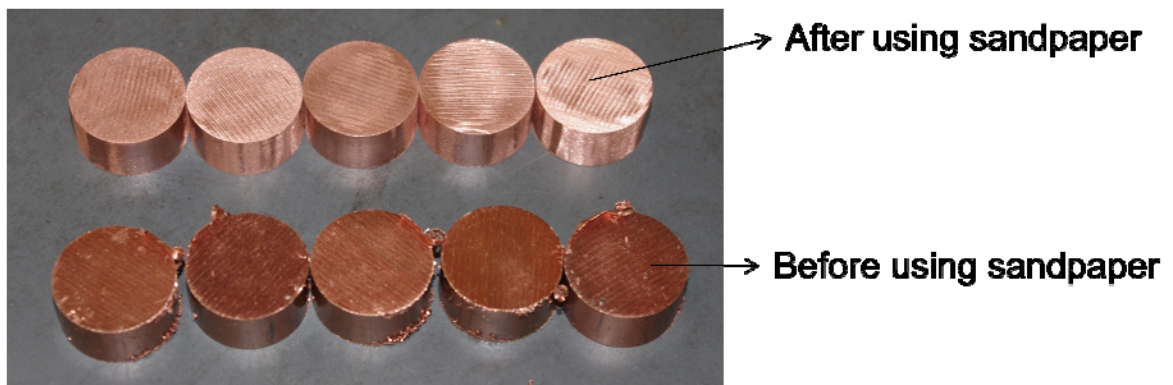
Copper pieces smoothed by using sandpaper. These pieces have been used to make a staggered configuration of pin fin array
